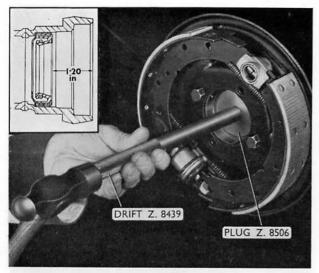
Driving home the axle shaft oil seal. Inset indicates location of seal in housing
